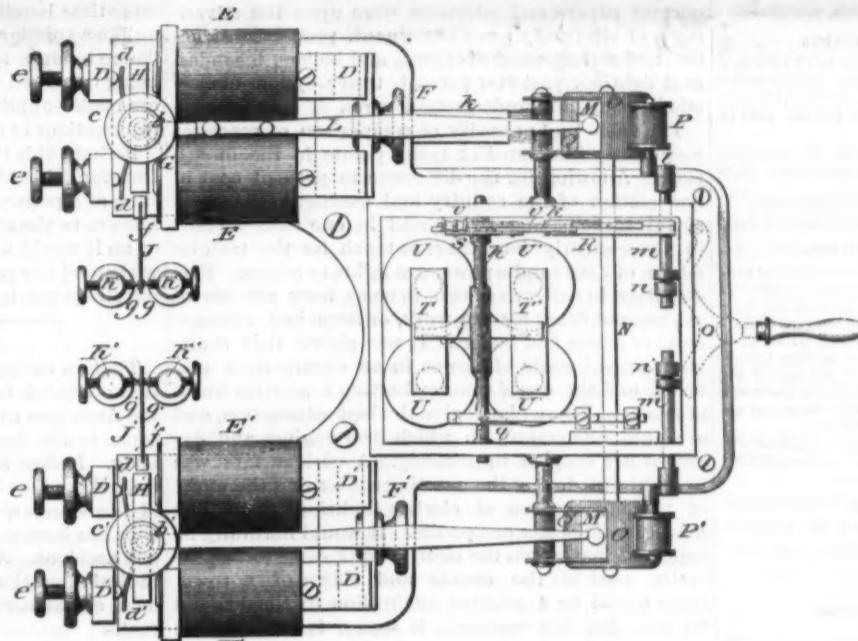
PLAN VIEW SHOWING ARRANGEMENT OF PARTS.
